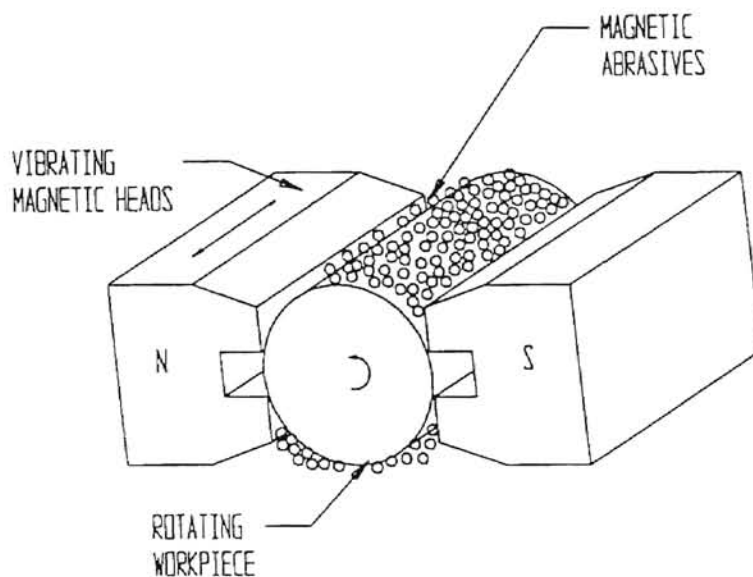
Typical Magnetic Abrasive Finishing Setup
